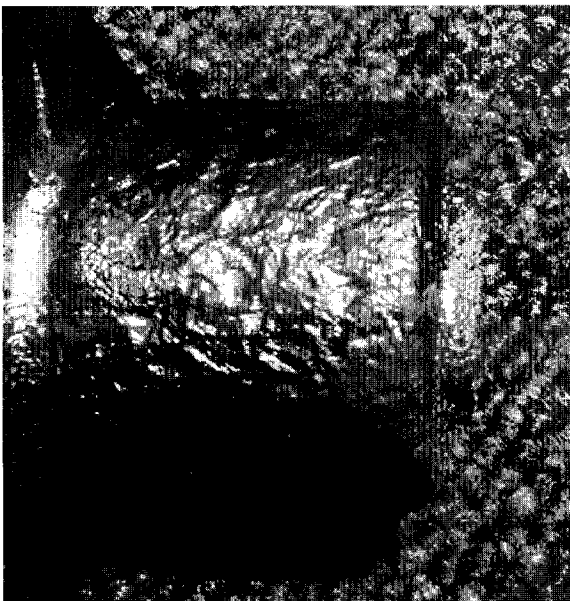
Lustrous carbon defect on the surface of a grey iron casting produced using a resin shell mould
